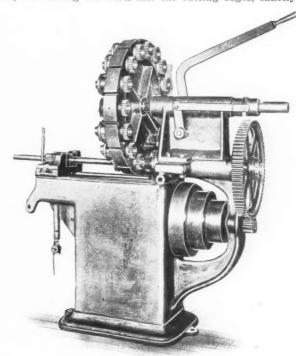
Rear View of the Multiple Die, Threading Machine.
